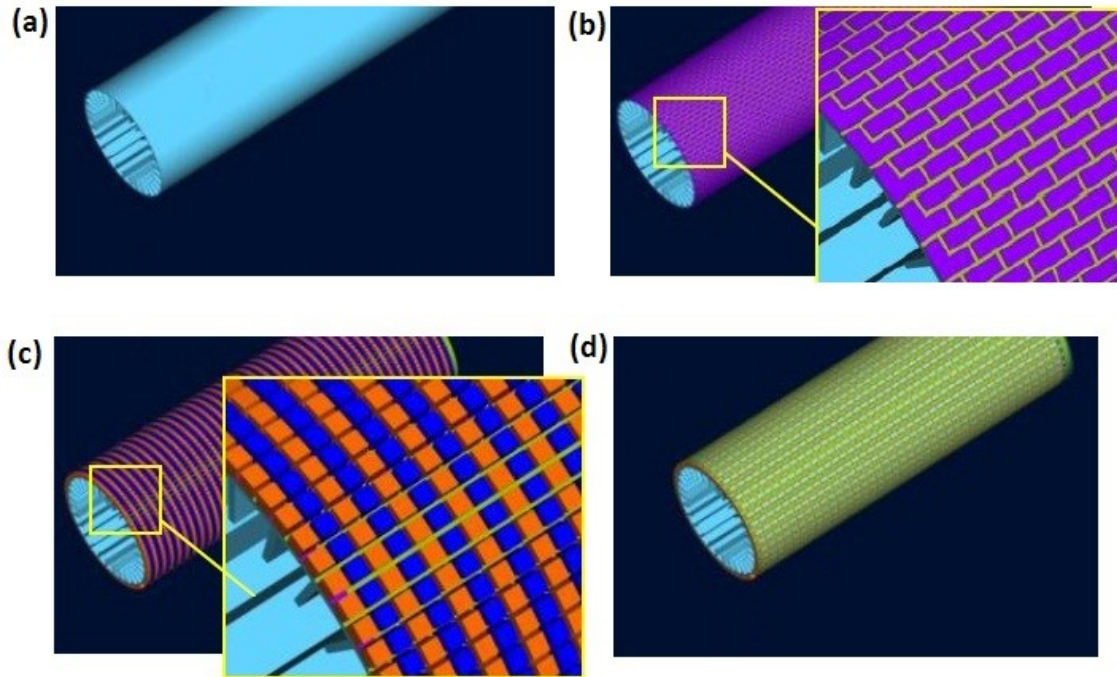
Process steps to fabricate a TEG module (a) exhaust component with an integrated heat sink (b) apply bottom electrode and pattern, (c) deposit of n- and p-type TE legs, (d) fill the gap and deposit top electrode and top insulating layer.
